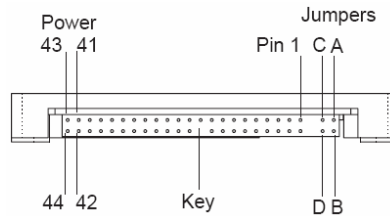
FiD 2.5" ATA8000-J Connector Layout
